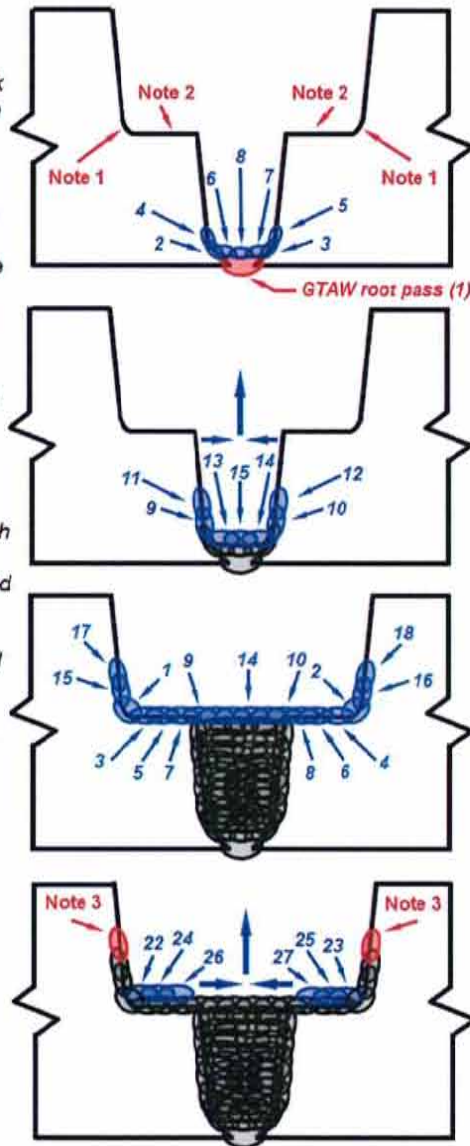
Schematic of the Controlled Fill Welding Procedure for Grade 91 Steel for a Full Penetration Weld repair Using a Step Weld Preparation.
